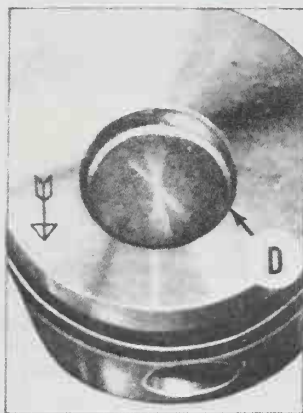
Install piston so depression (D) is nearer flywheel side of engine. Some pistons may have an arrow on crown and arrow must point towards flywheel.
